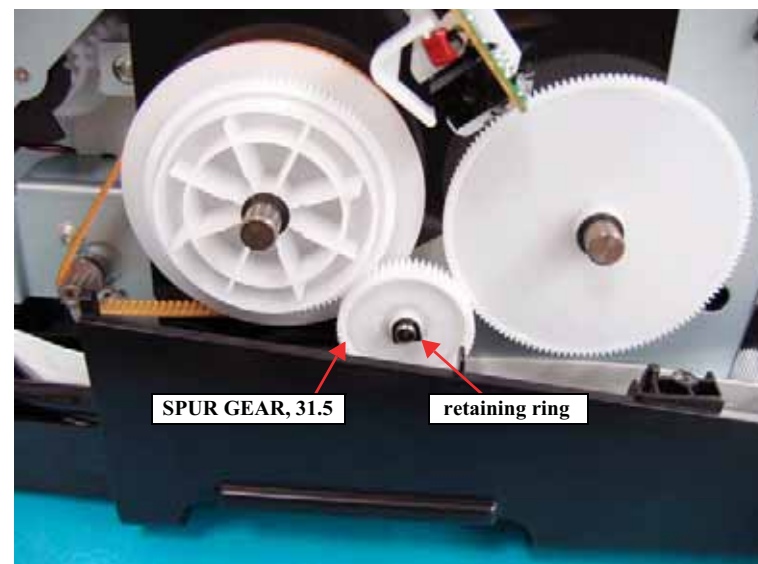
Removing the SUPUR GEAR, 31.5 (1)
